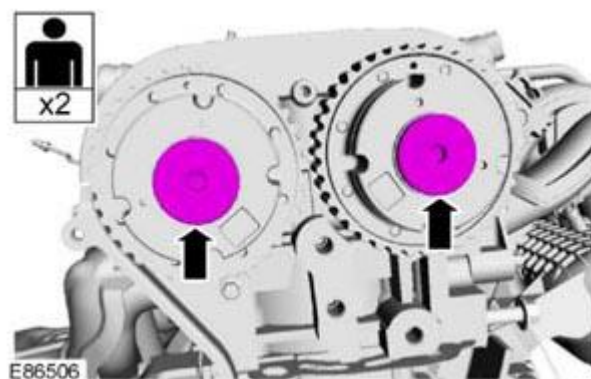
Locating Camshaft Phaser And Sprocket Plugs
